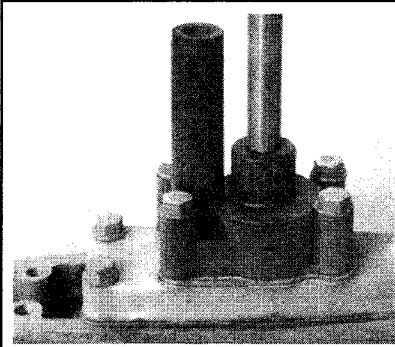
Most water pumps are mounted to the top of the gearcase lower unit
